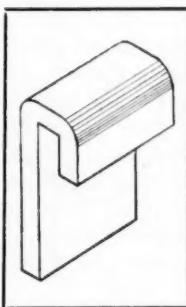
This double bend, formed in a brake, has sharp inside corners with space between inside faces equal to approximately the thickness of sheet.
